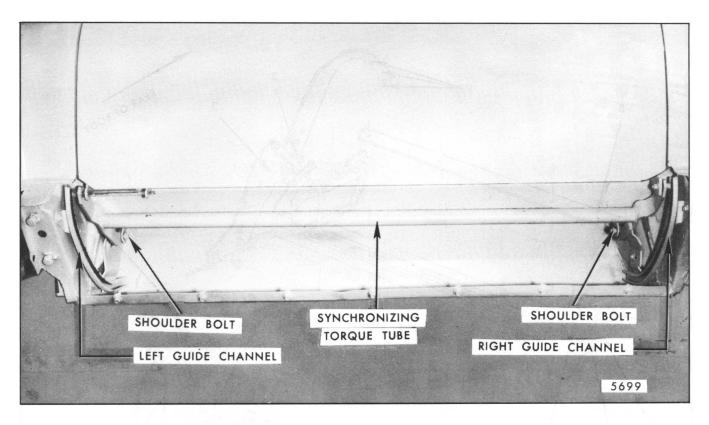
Tailgate Synchronizing Torque Tube and Guide Channels
